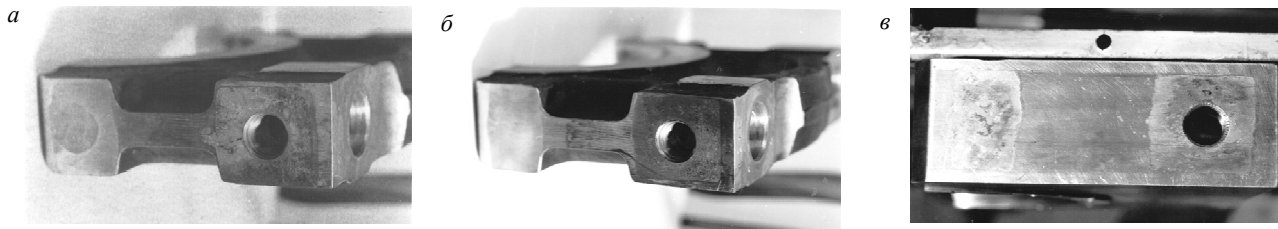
Fretting on the side surface of the main bearing cap after operating 7640 hours (a); 10830 hours (b); 12480 hours (c)
